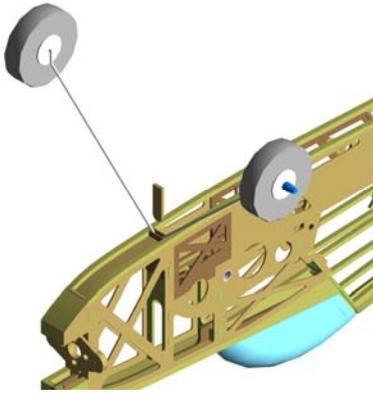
Install the wheels using the provided wheel retainers. Insert the gear into the socket on the fuselage. Use plywood part F1A to wedge the gear in. Some sanding of F1A will be required to make it fit. Do not glue the gear in place as this will make repairs difficult.
